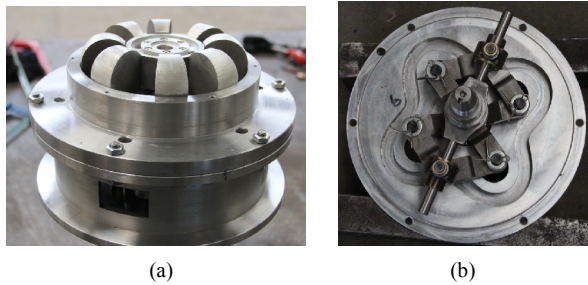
The prototype of TRPE: (a) engine assembly; (b) its DVDM.
